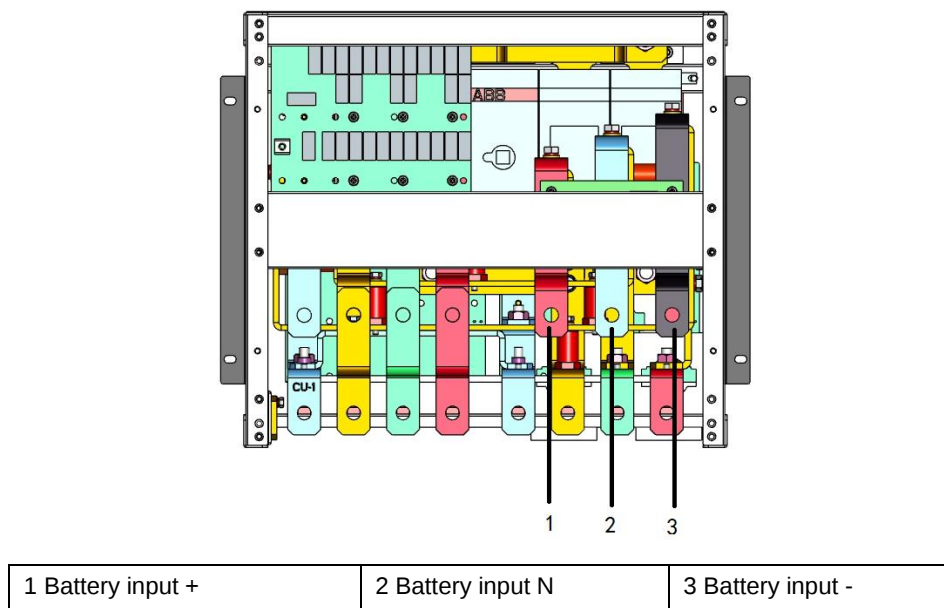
Connecting battery cables (300 kVA top cable entry)
